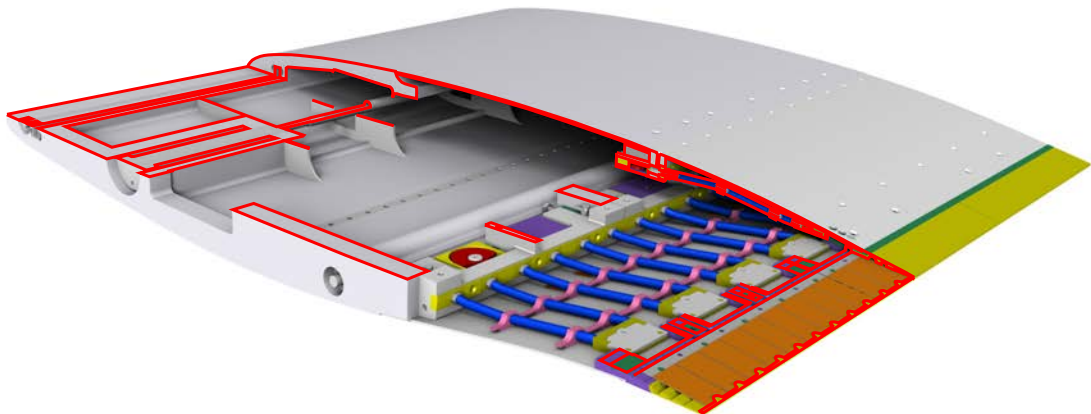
A CAD partial sectional view of the wing design. Screws, wires and sensors are not represented. Cut sections' edges are highlighted in red.
